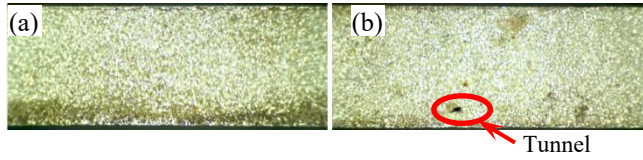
Cross-Sectional views of FSW joints (without etching) under different process conditions, (a) Square pin ($n = 1240$ rpm, $v = 315$ mm/min), and (b) Taper-Threaded pin ($n = 1240$ rpm, $v = 200$ mm/min).
